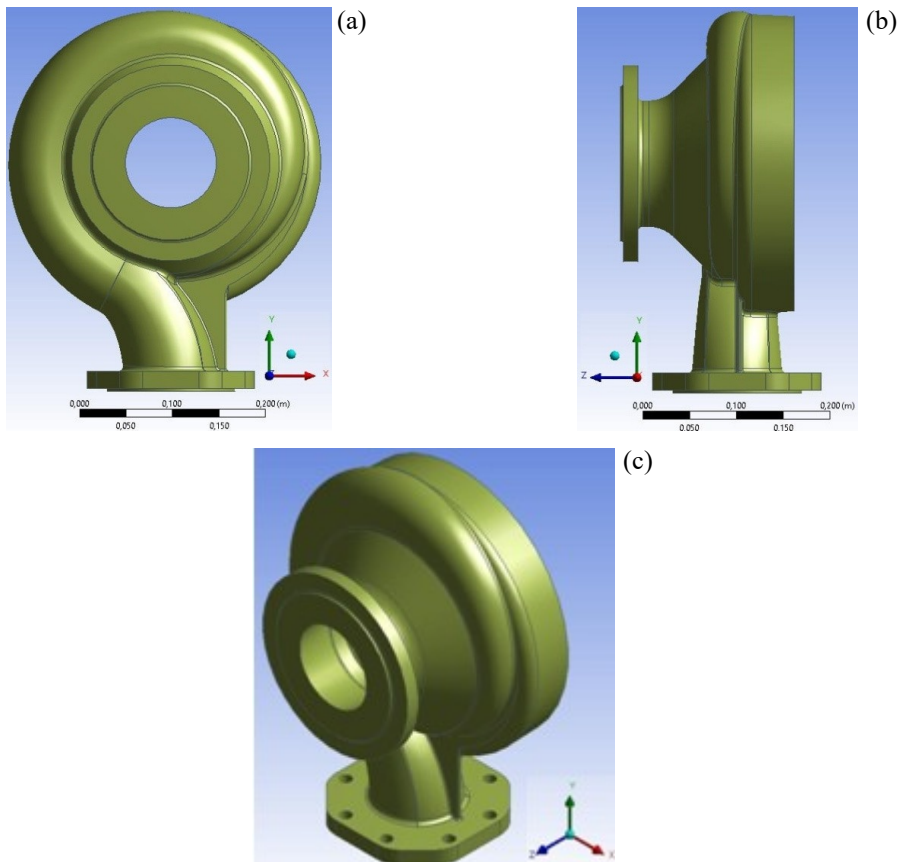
3D geometric reproduction of the HA SS PAT volute: (a) front view, (b) side view and (c) isometric view
